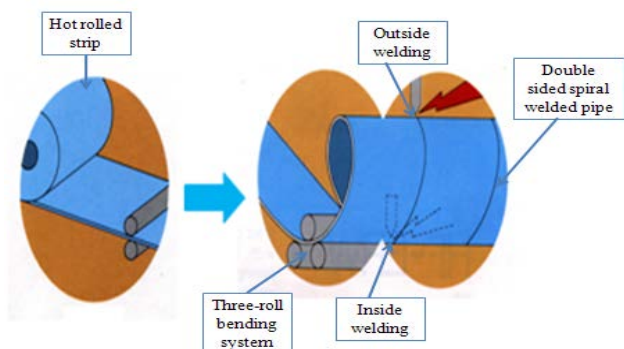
Production of spiral welded steel pipes by SAW
